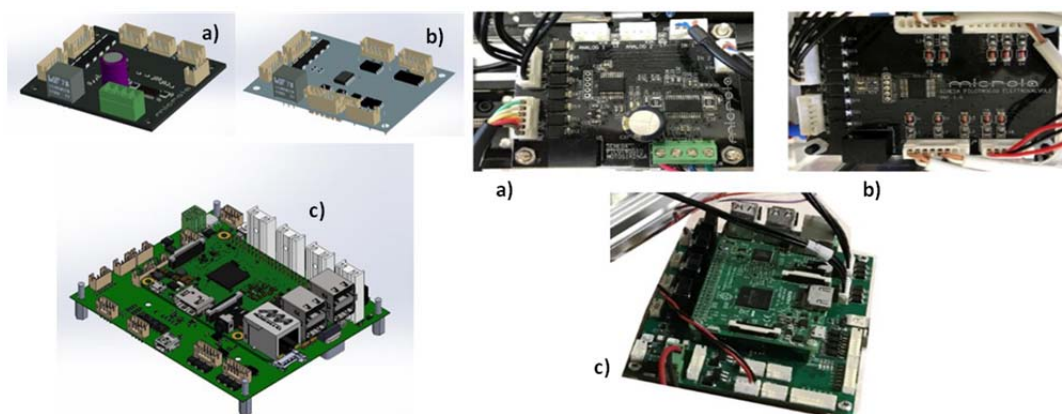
CAD renderings and realization of electronic boards: a) Moto-syringes board, b) valve board, c) motherboard.
